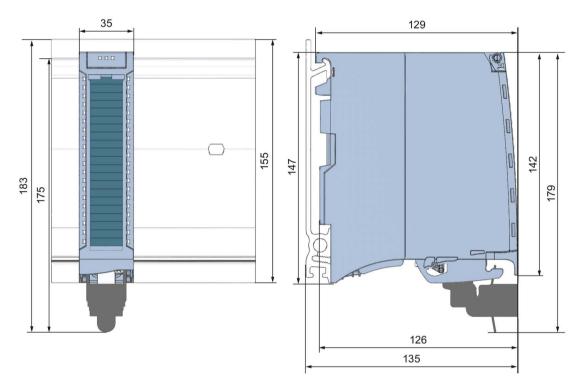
Dimensional drawing of the AQ 8xU/I HS module
